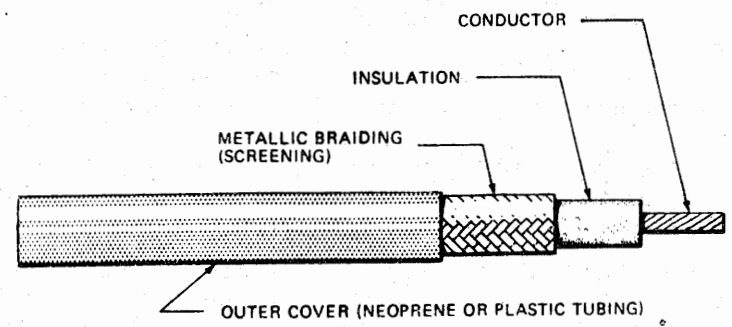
IGNITION CABLE WITH PROTECTIVE COVERING
